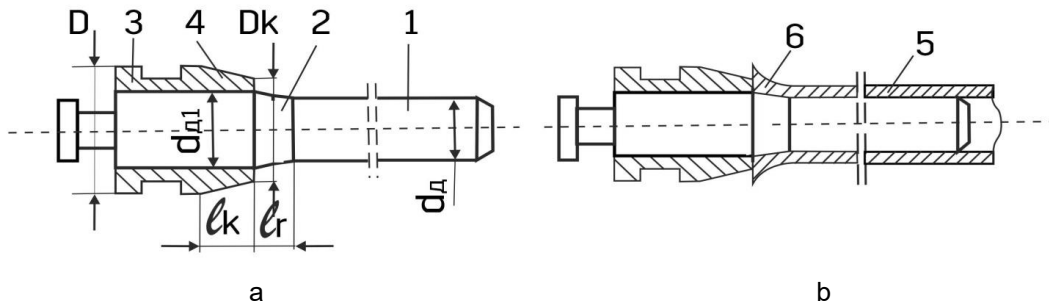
New mandrel device (a) and rolled pipe (b): 1 – mandrel; 2 – conical shank; 3 – mandrel ring; 4 – front end of the ring; 5 – pipe; 6 – pilger head
